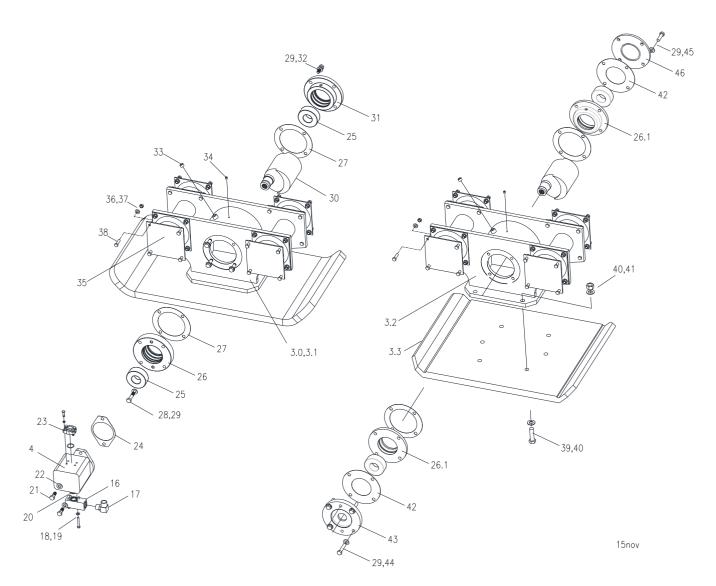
Dynamic Assembly Begin SN-1600 (Left) Dynamic Assembly End SN-1599 (Right)
